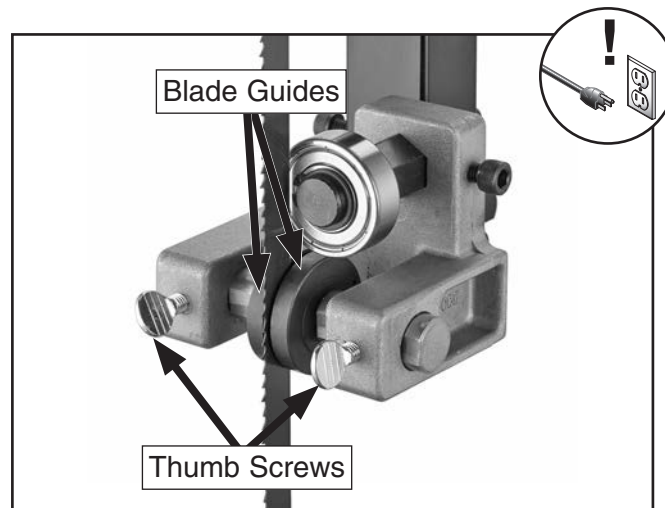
Upper blade guide components (guide post cover removed for clarity).
